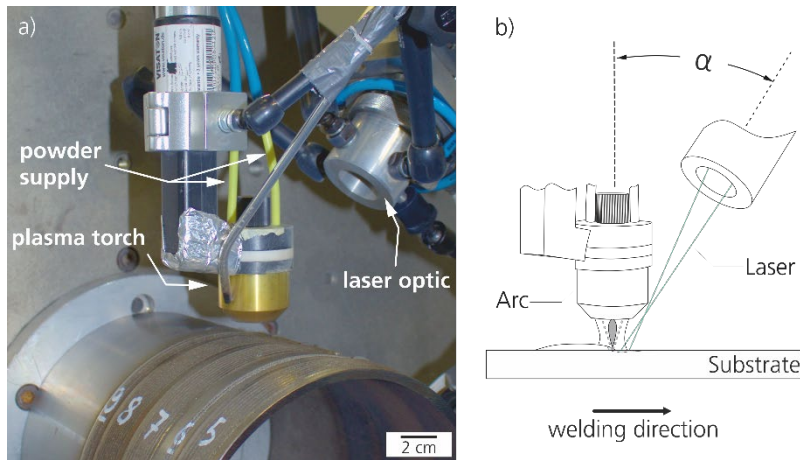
a) Experimental setup of the plasma laser hybrid deposition welding process in the laboratory b) Schematic diagram of the arrangement of the energy sources
